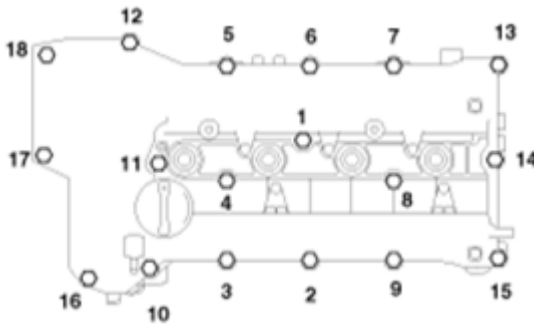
Identifying Tightening Sequence Of Cylinder Head Cover Bolts
